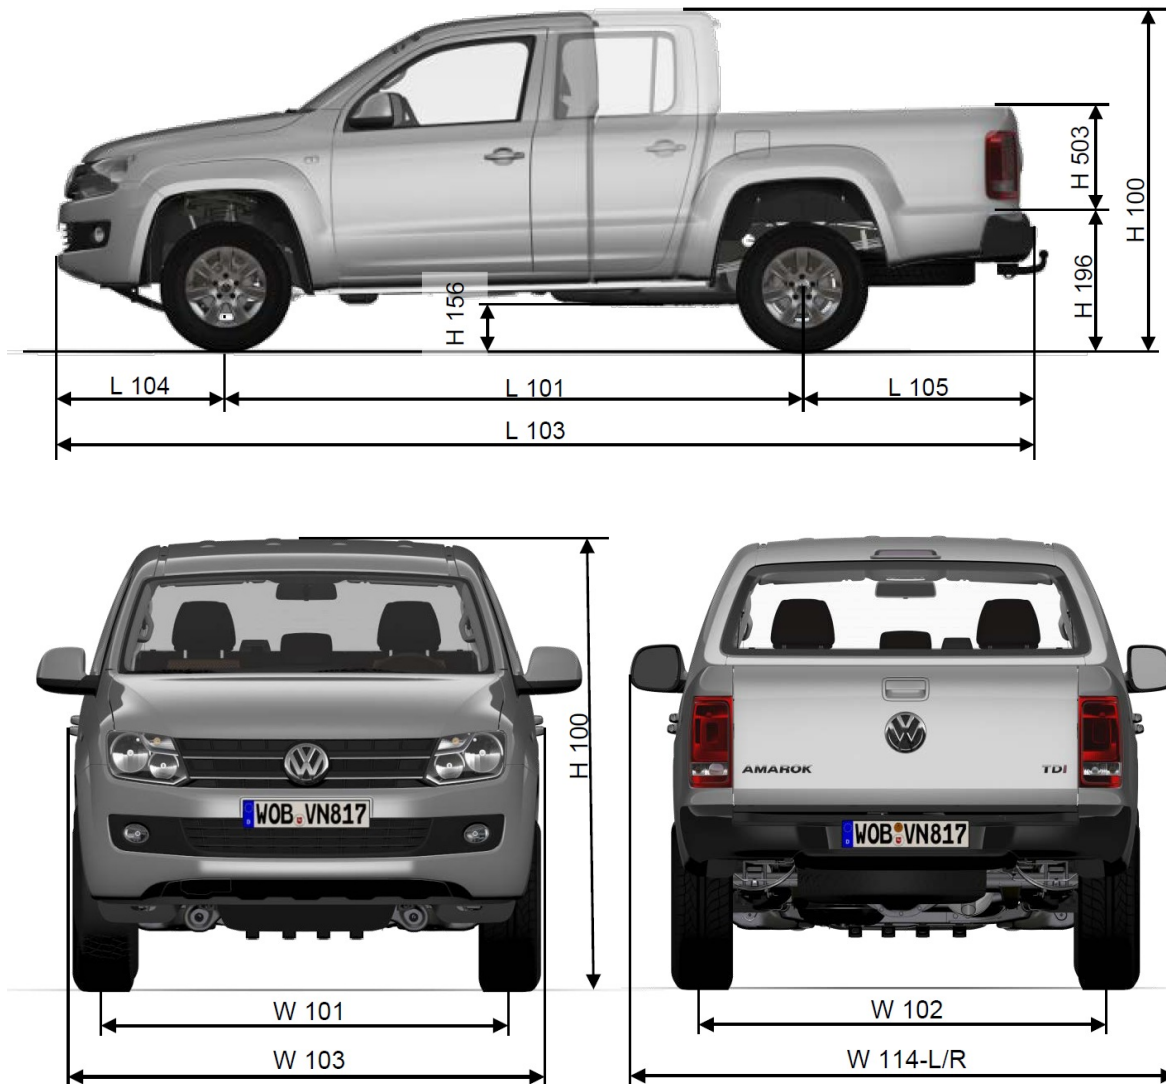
Vehicle dimensions of AMAROK (views: side, front and rear)
